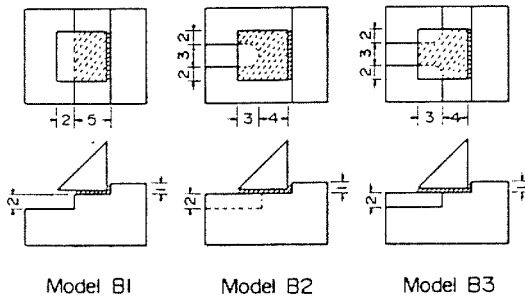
Shapes and dimensions of the specimens. (Model B1, B2, B3)
